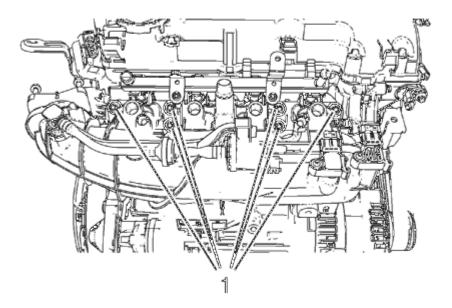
Throttle Body And Bolts Courtesy of GENERAL MOTORS COMPANY
